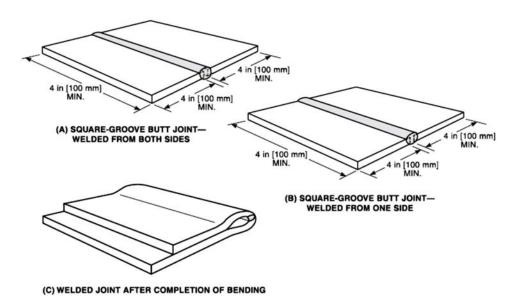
Bend test for square groove welds in butt joints
